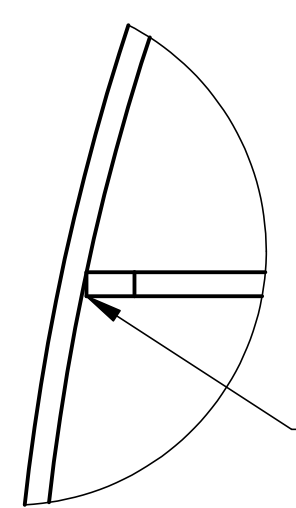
2 TYP FOR ALL GUSSET INTERSECTIONS
